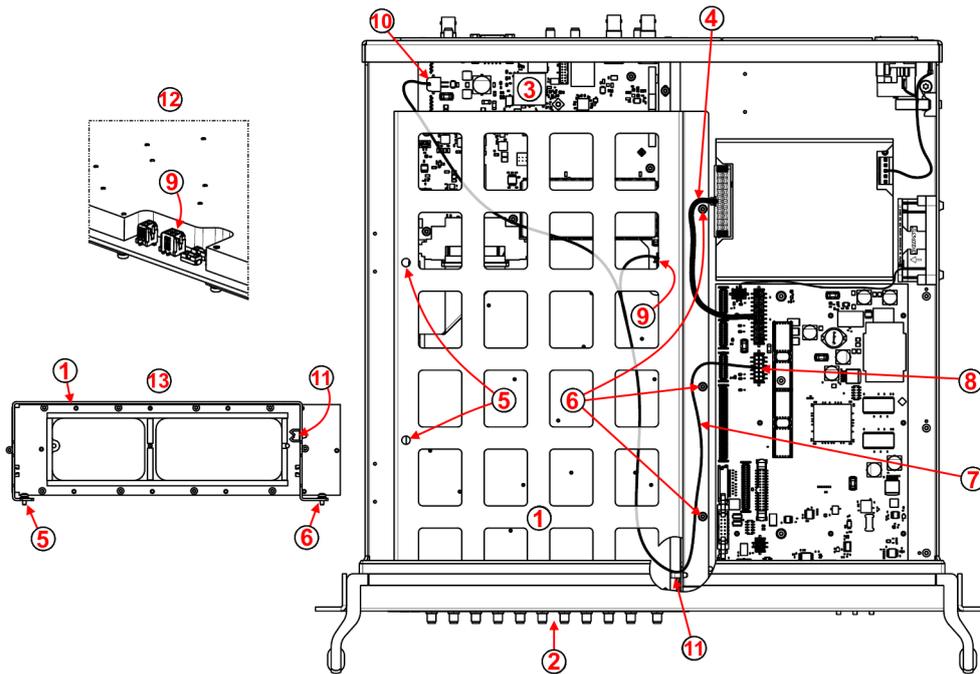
Opened switch unit with guide cage mounted and base module inserted
